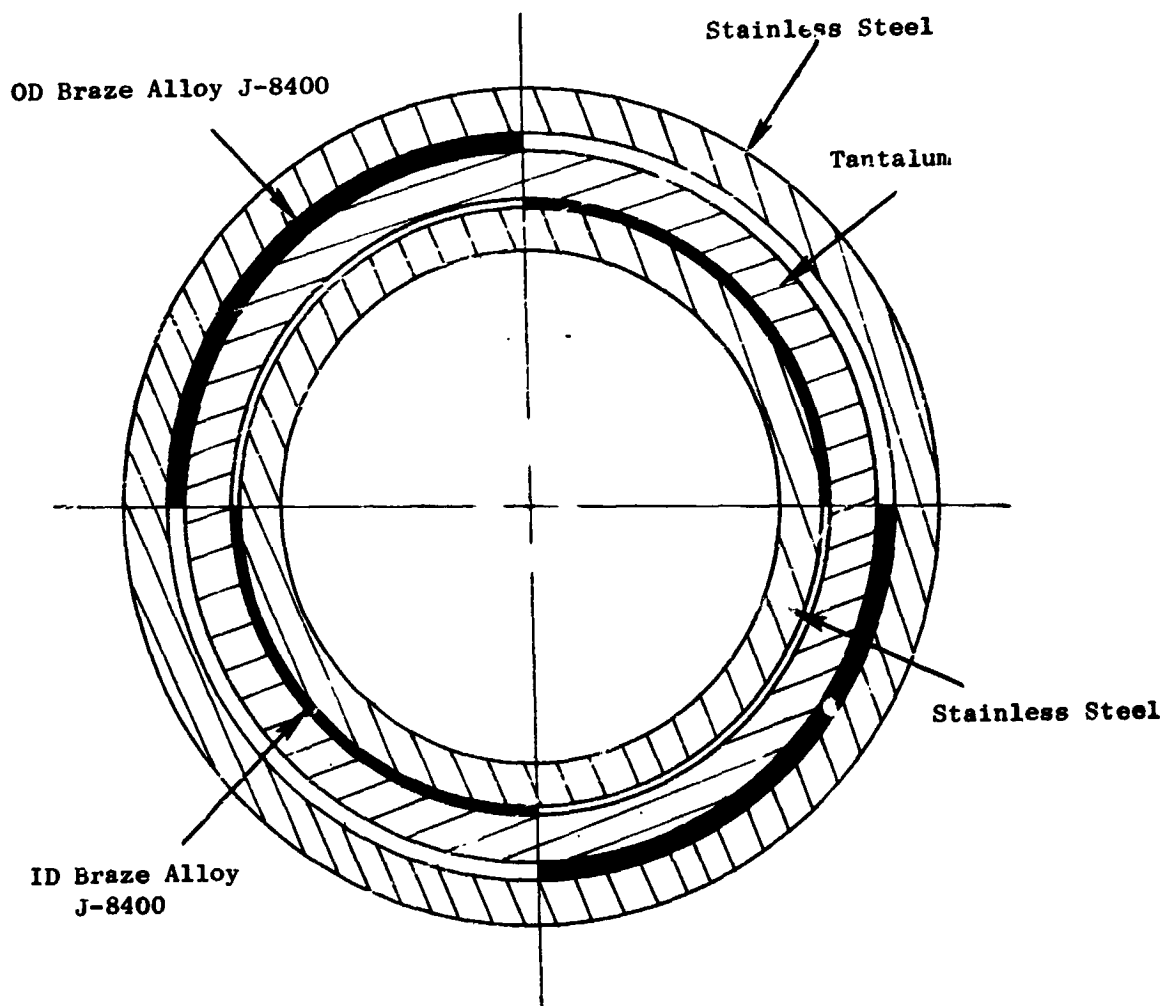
Sketch of Transverse Section of Intentionally Misbrazed Ta/Type 316 SS Tubular, Tongue-in-Groove Joint Showing Areas of Brazing. Assembly Used as Ultrasonic Standard.
